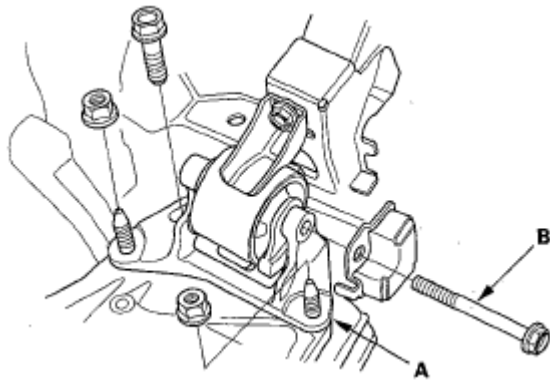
Identifying Transmission Mount Bracket And Transmission Mounting Bolt
